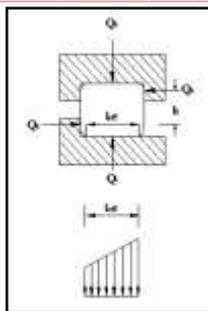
loading of cylindrical roller bearing under applied combined radial and axial loads
